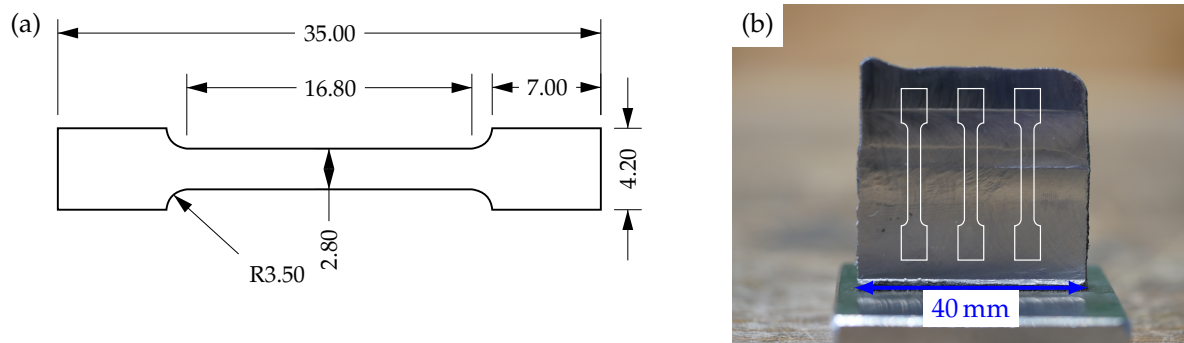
(a) Specimen geometry used for tensile testing, adopted from [34]. Dimensions in millimeter; (b) location of tensile testing specimens within the structures manufactured by laser-based DED. Depicted is as-milled surface condition.
